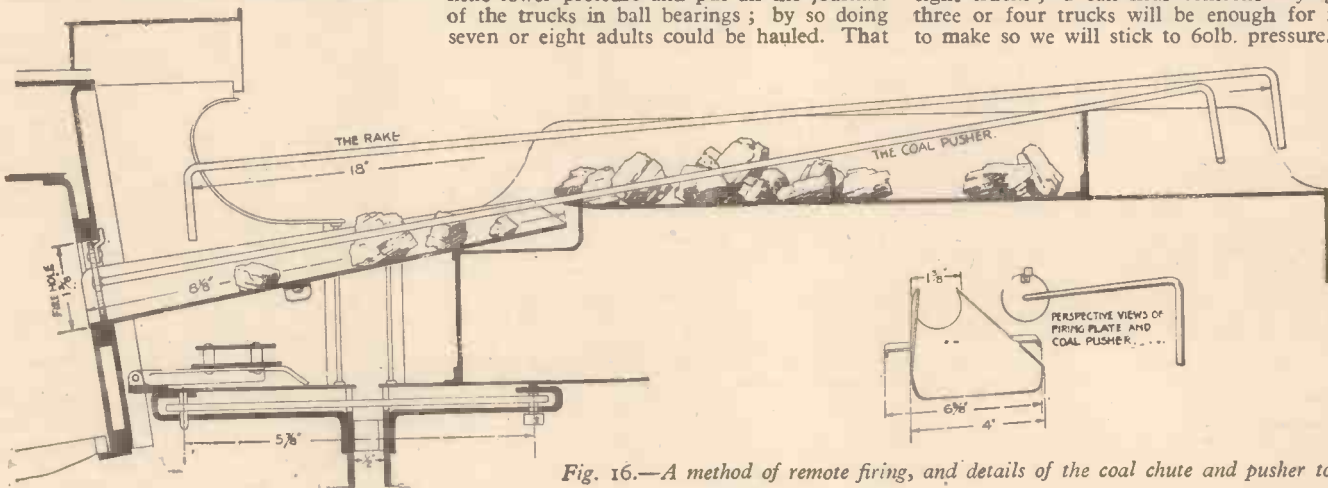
A method of remote firing, and details of the coal chute and pusher tool.
